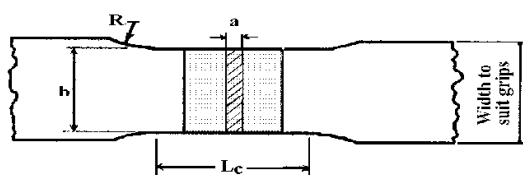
Butt weld tensile test specimen
